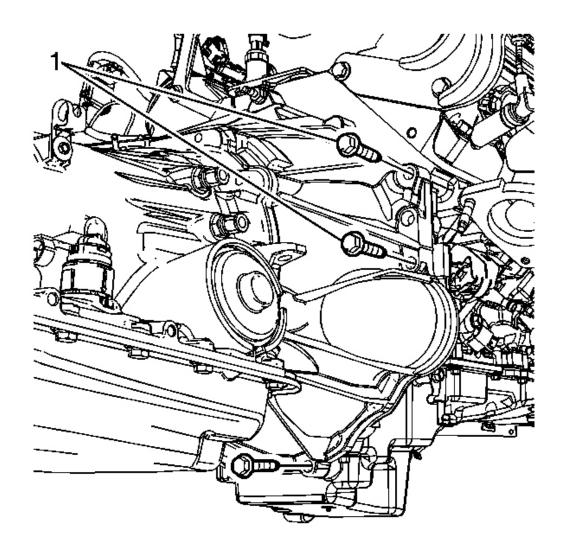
Lower Transmission Bolt/Studs - Right & Left Side Courtesy of GENERAL MOTORS CORP.
